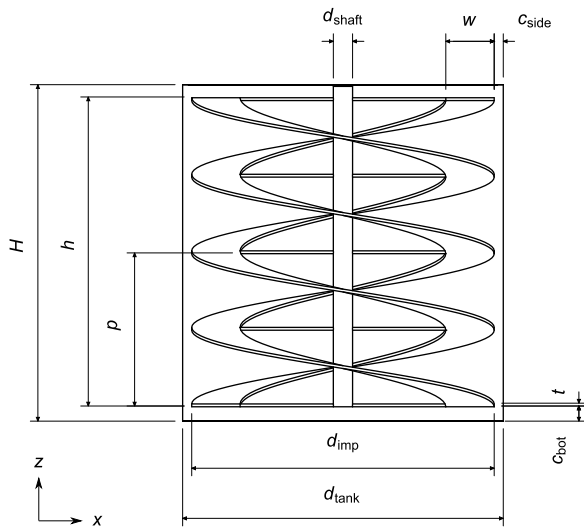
Helical ribbon impeller labelled with key dimensions. xz view. Labelled quantities are as follows: tank height, H ; impeller height, h ; helix pitch, p ; tank diameter, d_{tank} ; impeller diameter, d_{imp} ; shaft diameter, d_{shaft} ; bottom impeller clearance, c_{bot} ; side impeller clearance, c_{side} ; blade width, w ; blade and support rod thickness, t .
